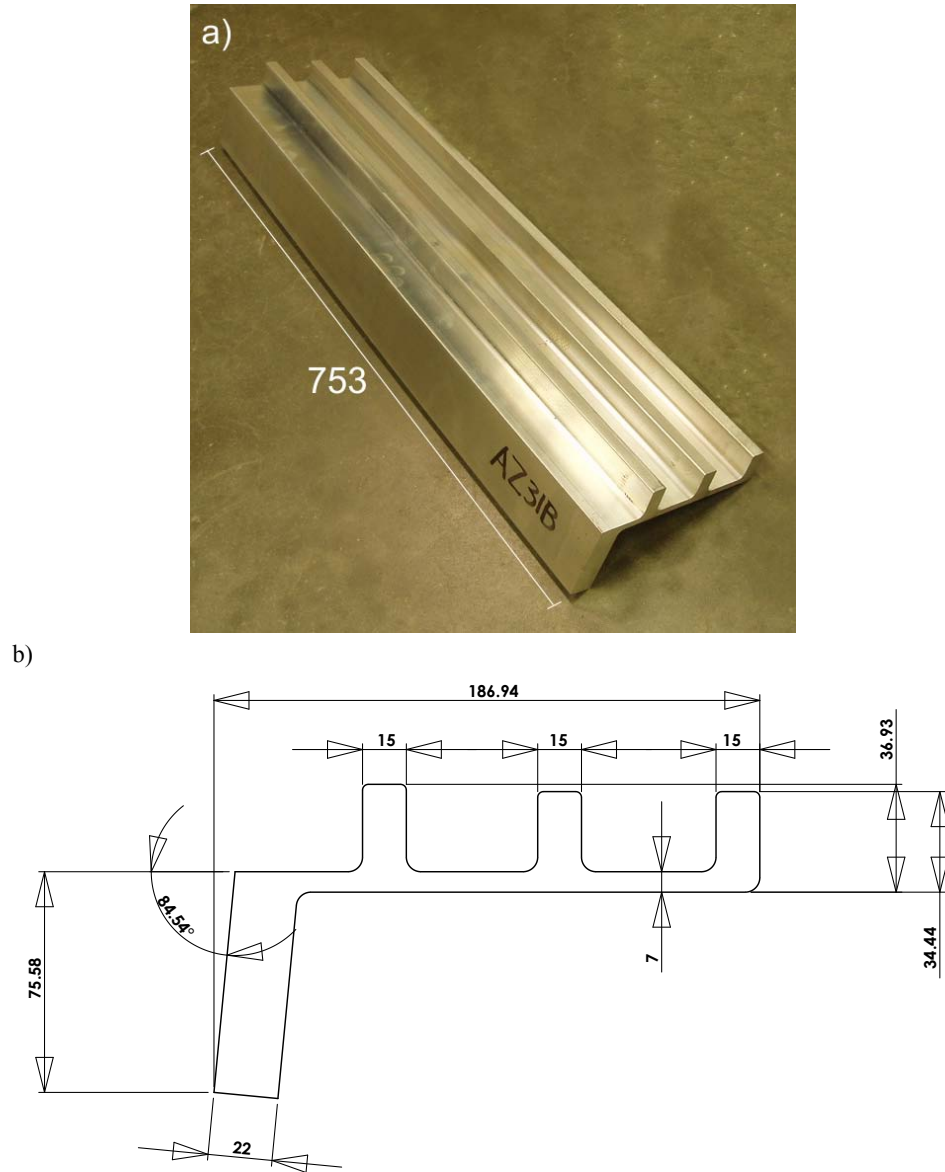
AZ31B extrusion. a) Extrusion section. b) Geometry and sizes. Dimensions in mm.
